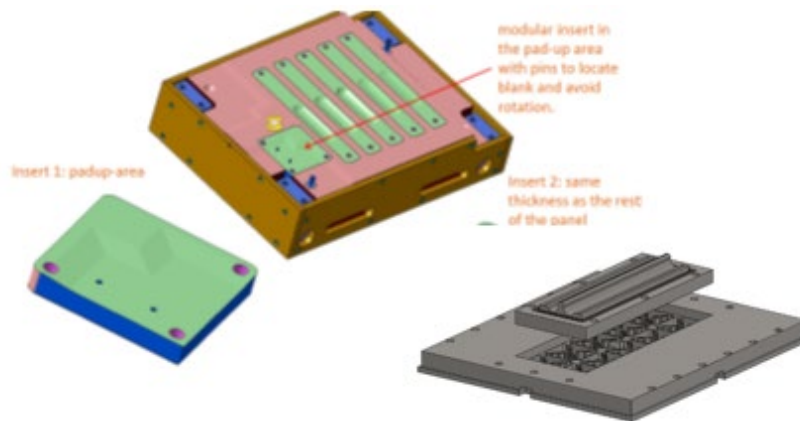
Representation of Tool Inserts. Courtesy of Solvay and Surface Generation.
